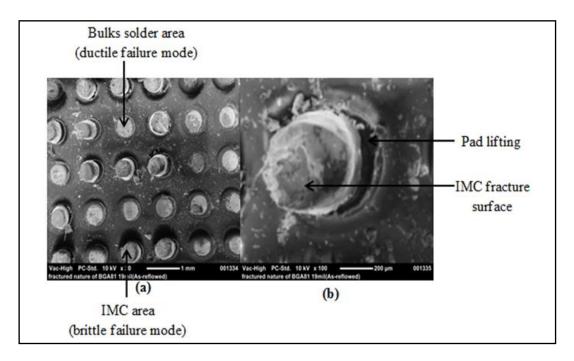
SEM of failure mode classification, for as-reflowed 19mil pad, with bulk solder/<u>IMC</u> fracture, (b) IMC fracture and pad lifting
